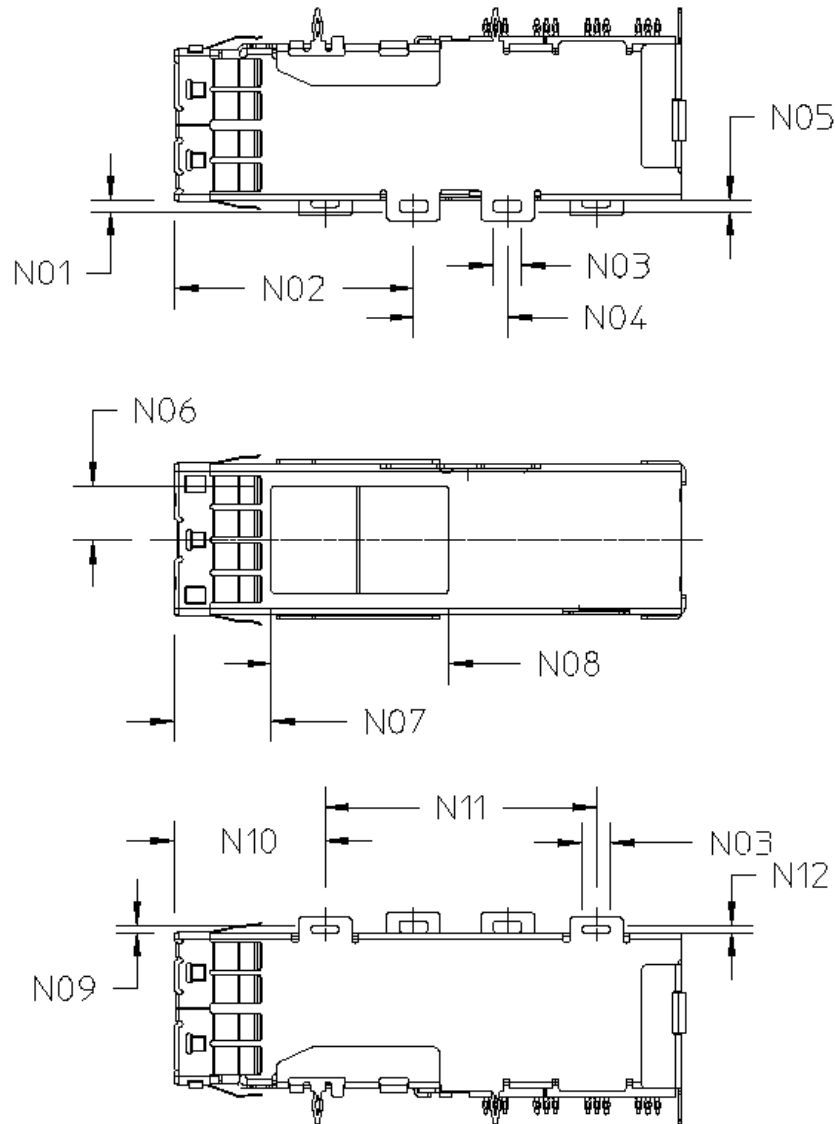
CAGE HEAT SINK ATTACHMENT
